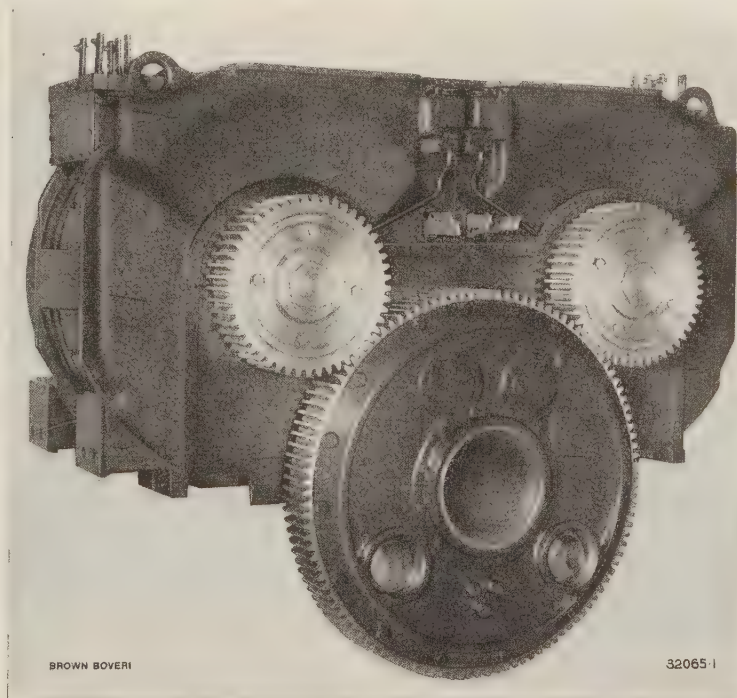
Motor group with gears and hollow shaft; locomotive in fig. 16 (see driving axle, fig. 17).
